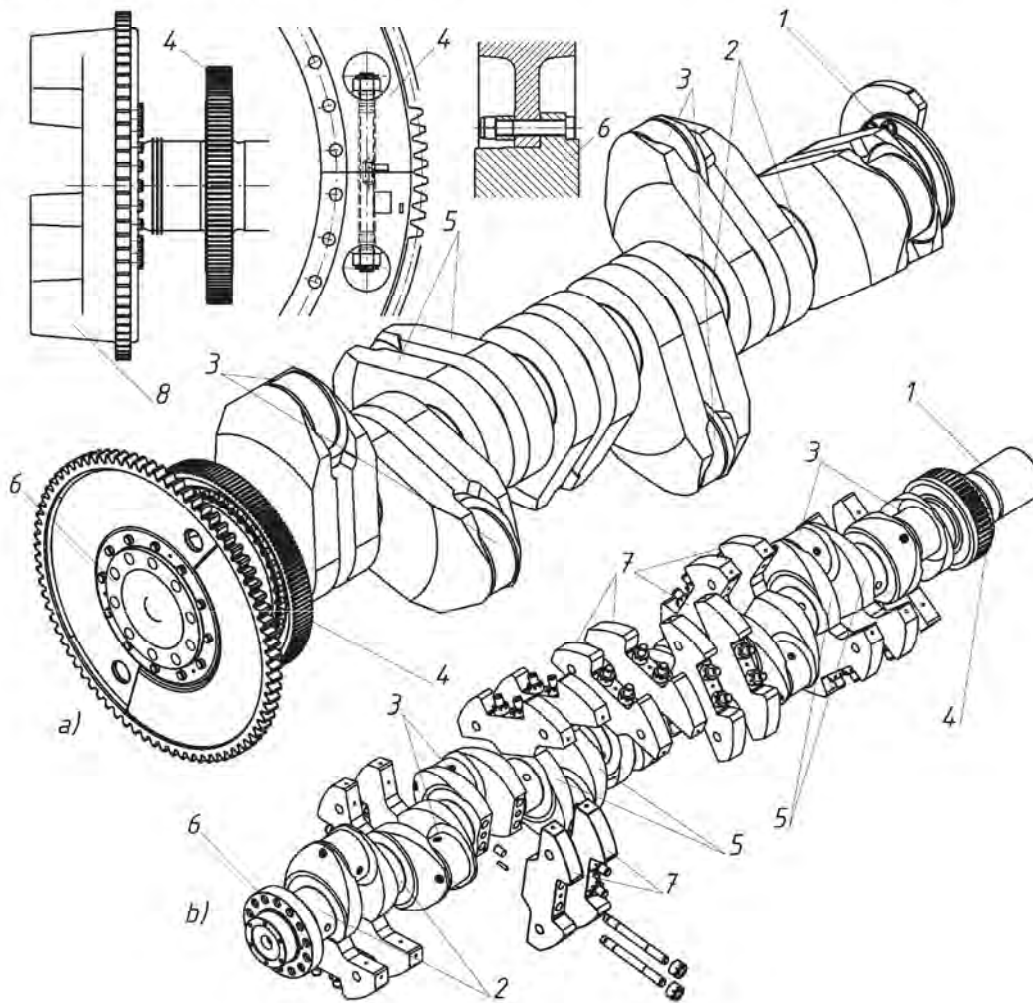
Crankshafts of marine internal combustion engines. *a* – two-stroke low-speed diesel engine RT-flex60C from Wärtsilä; *b* – four-stroke diesel engine L21/31 from MAN; 1 – flange for driving auxiliary mechanisms; 2 – frame (root) neck; 3 – crank (crank) neck; 4 – sprocket (gear) for driving gas distribution and auxiliary mechanisms; 5 – crankshaft cheek; 6 – flange for mounting the flywheel; 7 – counterweights; 8 – flywheel (adapted from [44, 45])
